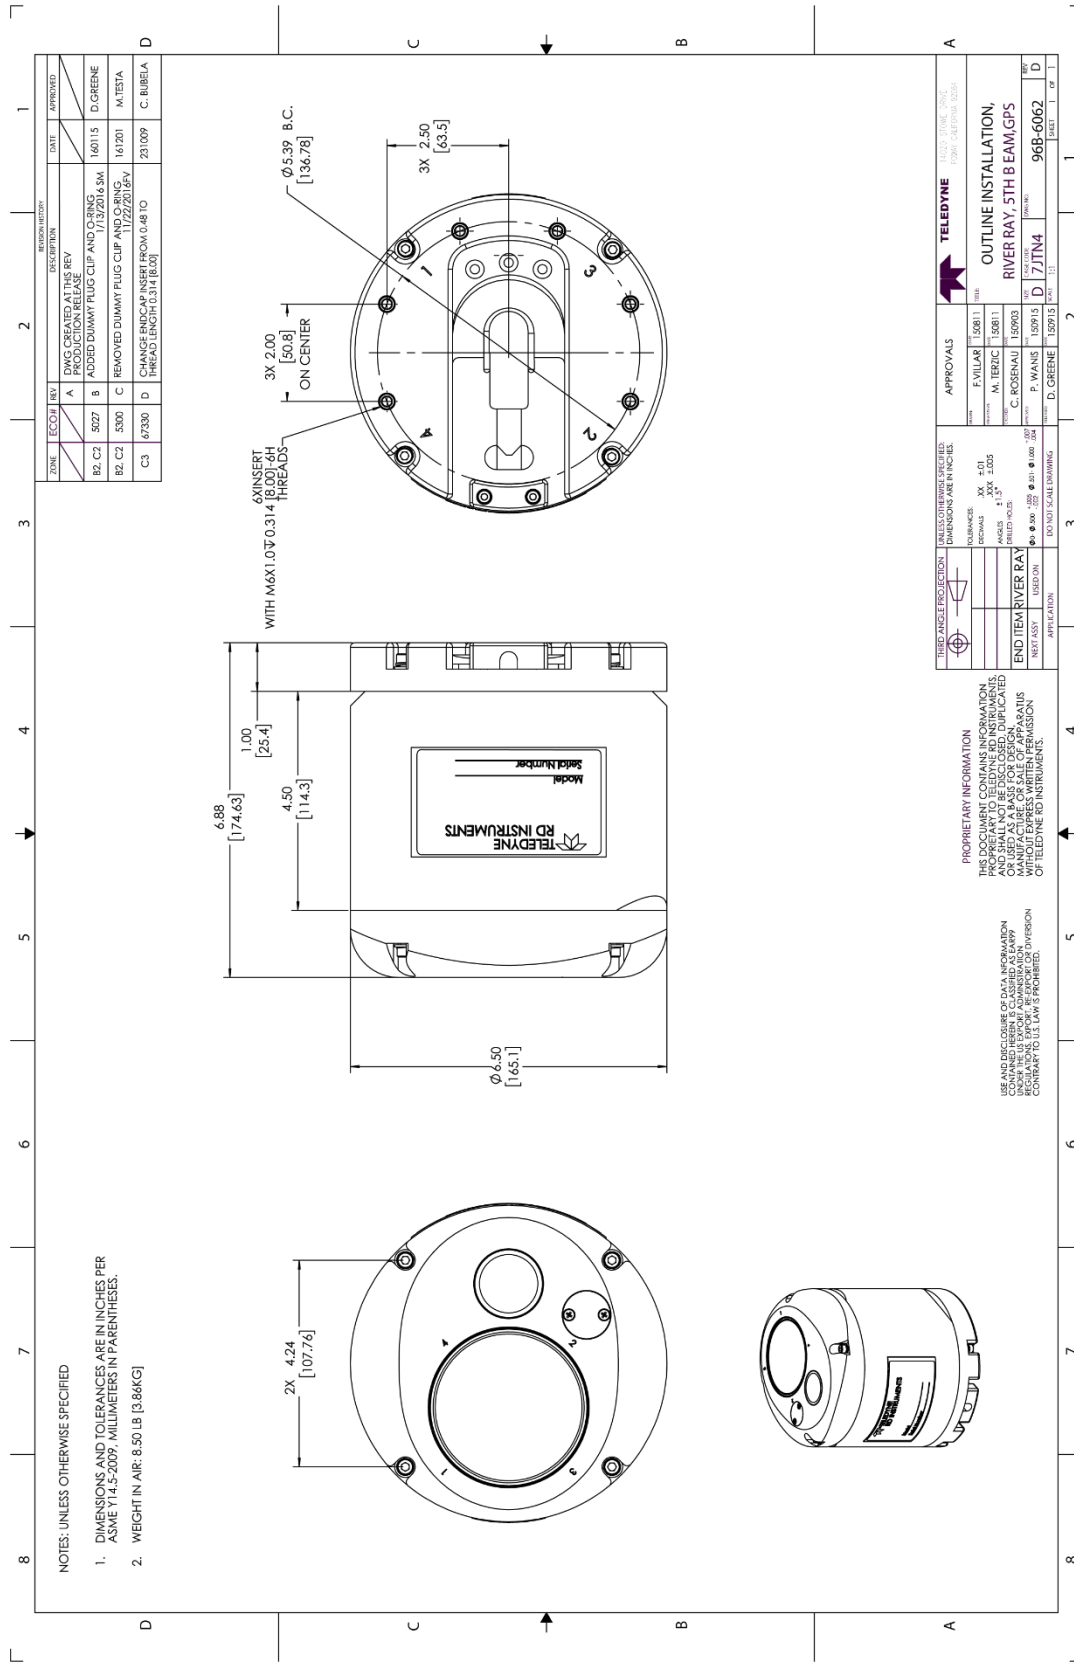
RiverRay Outline Installation Drawing – Vertical Beam, GPS
